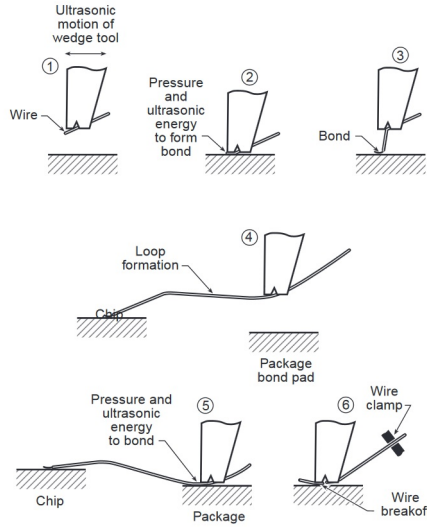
Storyboard showing each step in the wedge bonding process from a patterned sample (chip) to a chip-carrier-type sample holder (package). (1) The wire-threaded wedge tool is positioned above the chip area to be contacted. (2) The wedge tool is lowered onto the surface, with a calibrated force controlled by the instrument, and an ultrasonic pulse applied (providing energy to form a bond between wire and contact pad). (3) The tool is retracted from the new bond, feeding out the wire loop. The loops should be as short as possible and coplanar to any applied magnetic field direction, in order to minimize induced currents. (4) The tool is moved backwards to position it over the bond pad of the chip-carrier package (as illustrated in Fig. 46). (5) The tool is lowered to the pad, as in step (2), to make a second bond. (6) Wire clamp closes on the wire, such that it breaks after the second bond and forms a loop contacting the chip to the bond pad [121].
